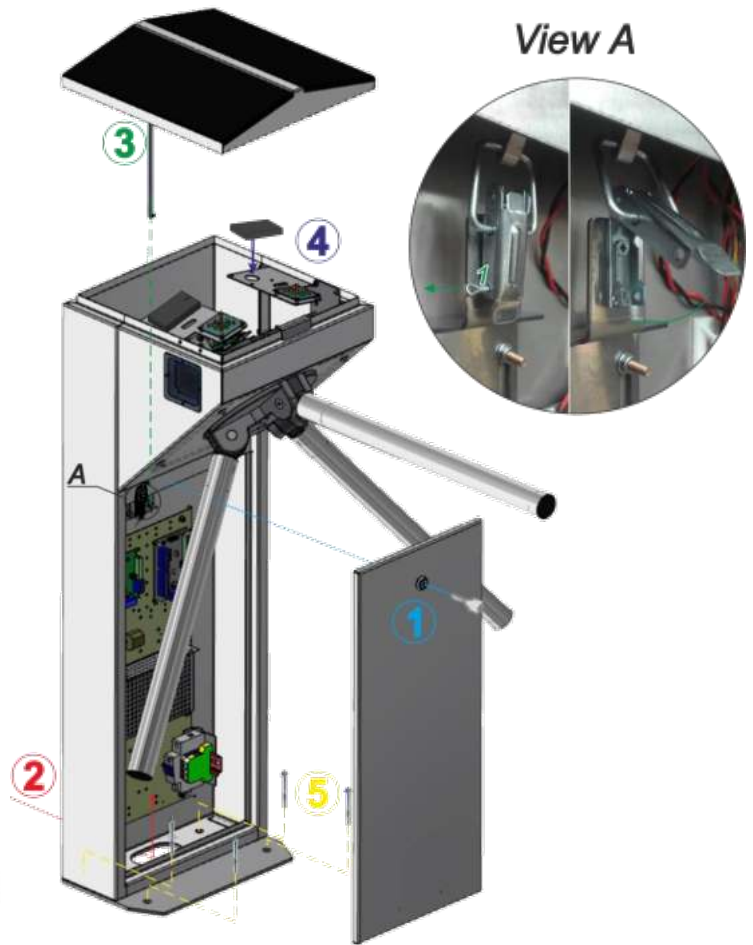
General view of the "CENTURION-M" and "BASTION-M" and turnstiles assembly
